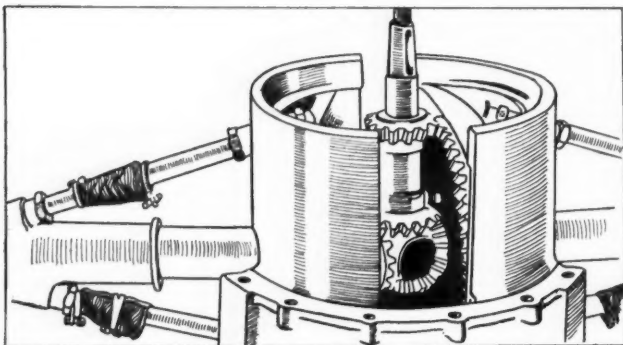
Sketch showing assembly of axle tubes with central housing in such a manner as to allow each tube to swing independently
